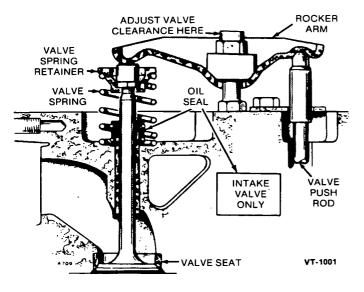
VALVE CLEARANCE ADJUSTMENTS
